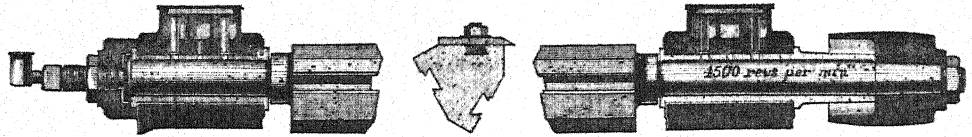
CUTTER BLOCK AND SPINDLE FOR 14-IN. TRYNG-UP MACHINE.
